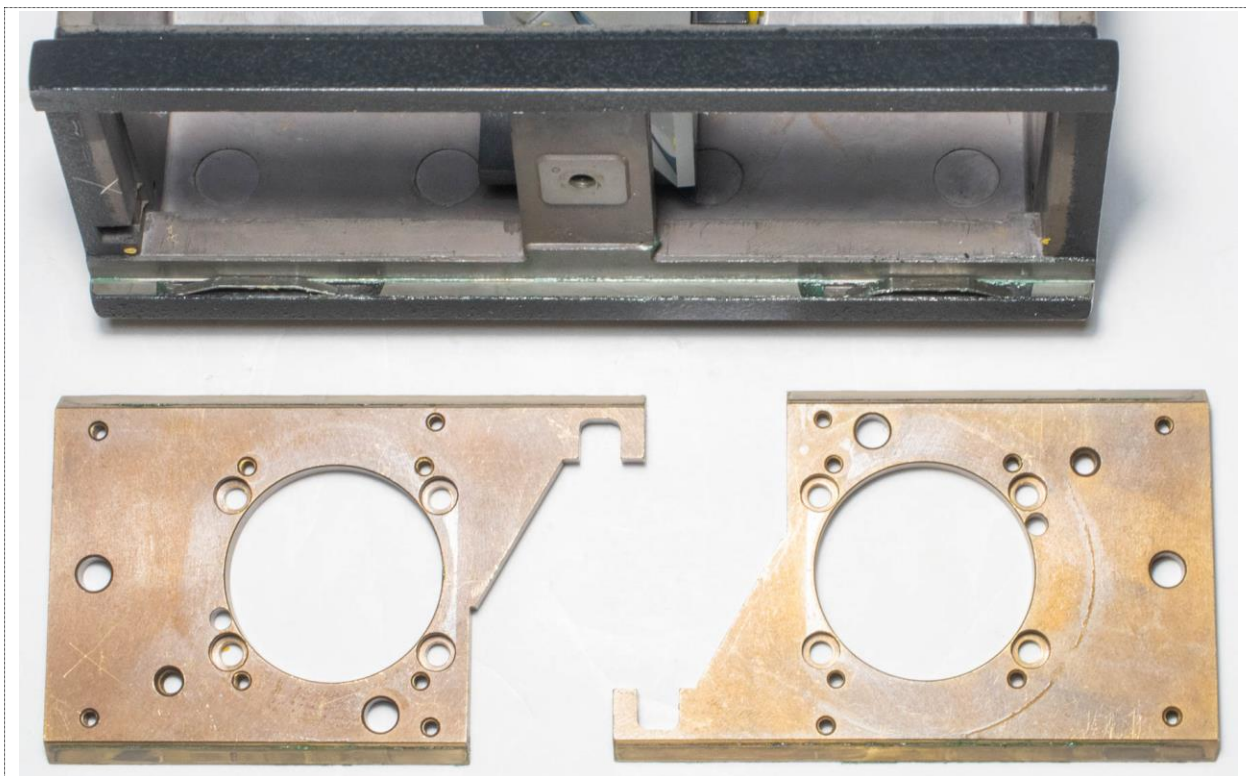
The front of the head with the interpupillary distance adjustment slides removed and placed below.
